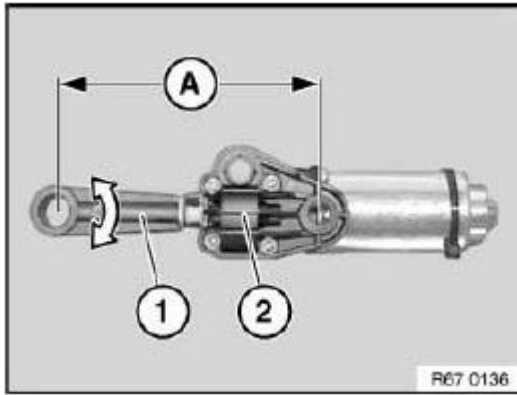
Identifying Adjust Measurement By Turning Spindle
